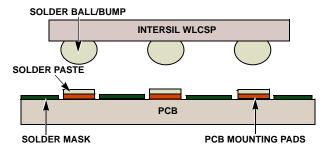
INTERSIL WLCSP PLACEMENT ON MOUNTING PAD WITH SOLDER PASTE - SIDE VIEW
